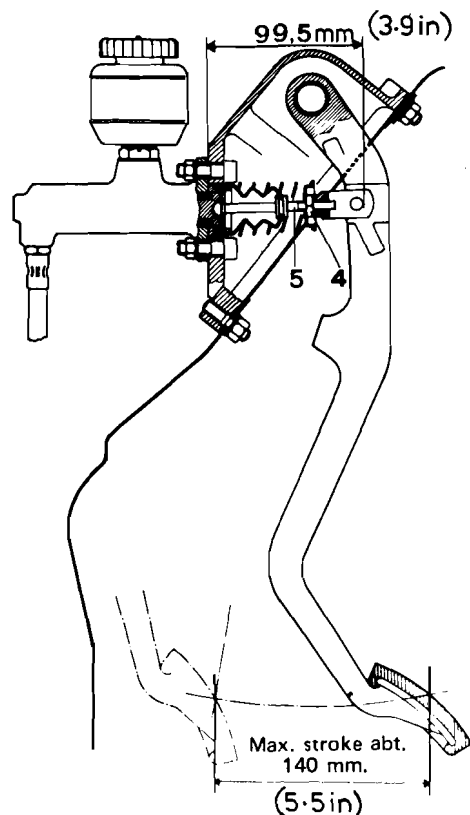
Clutch pedal setting diagram (Sec 9)
